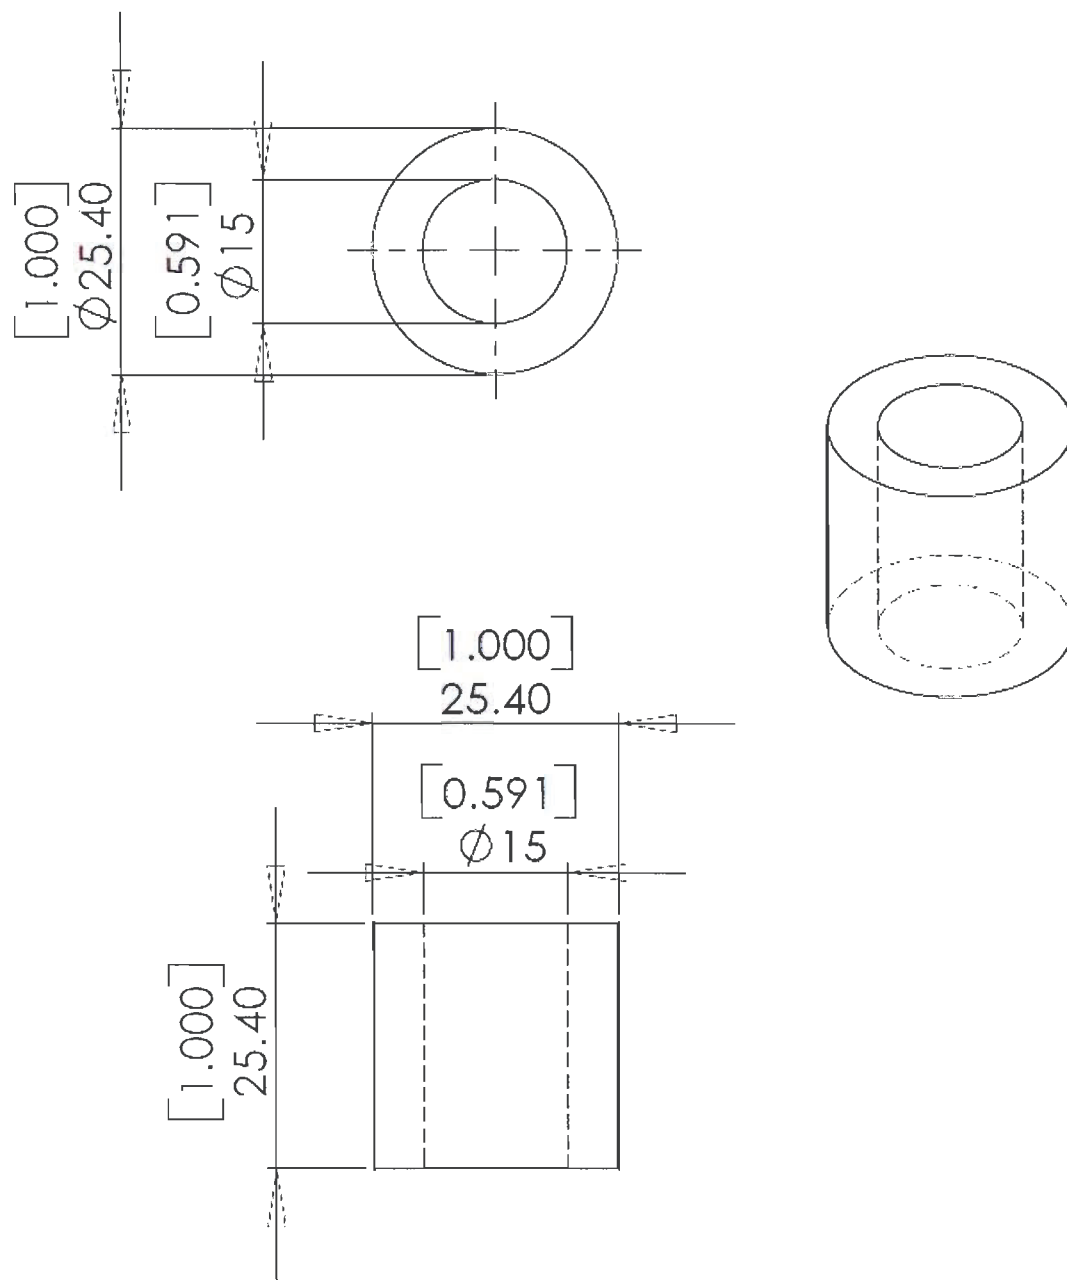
Dimensions of spindle shaft top ring used to hold centrifugal devices of different thicknesses.
